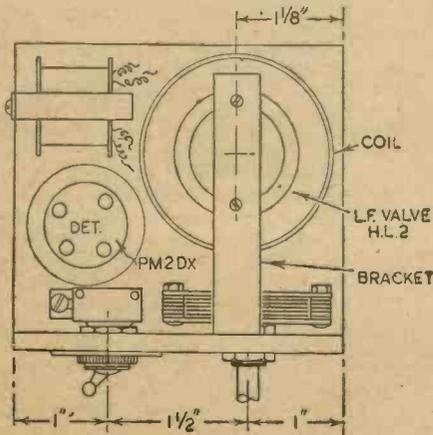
Plan view, showing lay-out of coil, valve-holders, and transformer.
